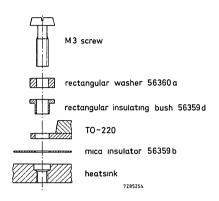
Insulated screw mounting with rectangular washer into tapped heatsink. Known as a "top mounting".
